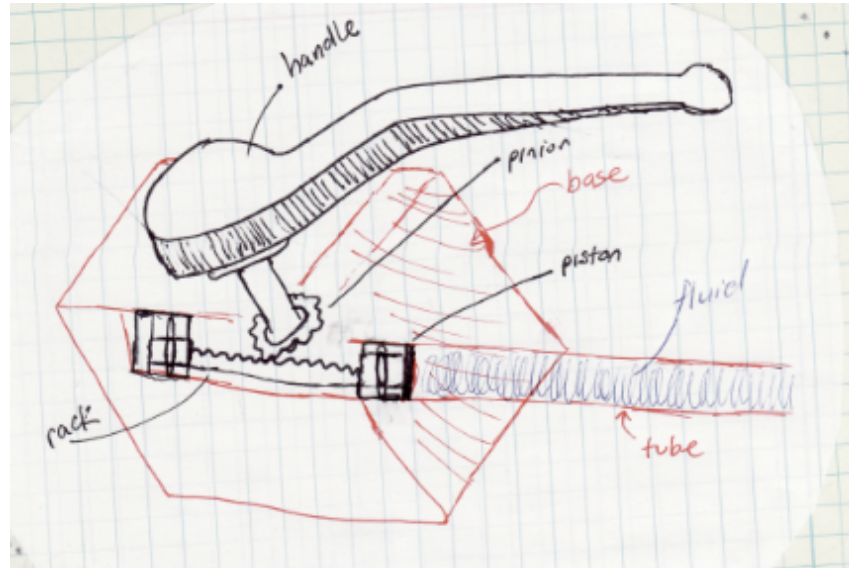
Hand-controlled, rack and pinion actuated hydraulic system. This system is manipulated by a handle that is rigidly connected to a pinion shaft of a rack and pinion system. The rack and pinion would push a hydraulic fluid back and forth.
